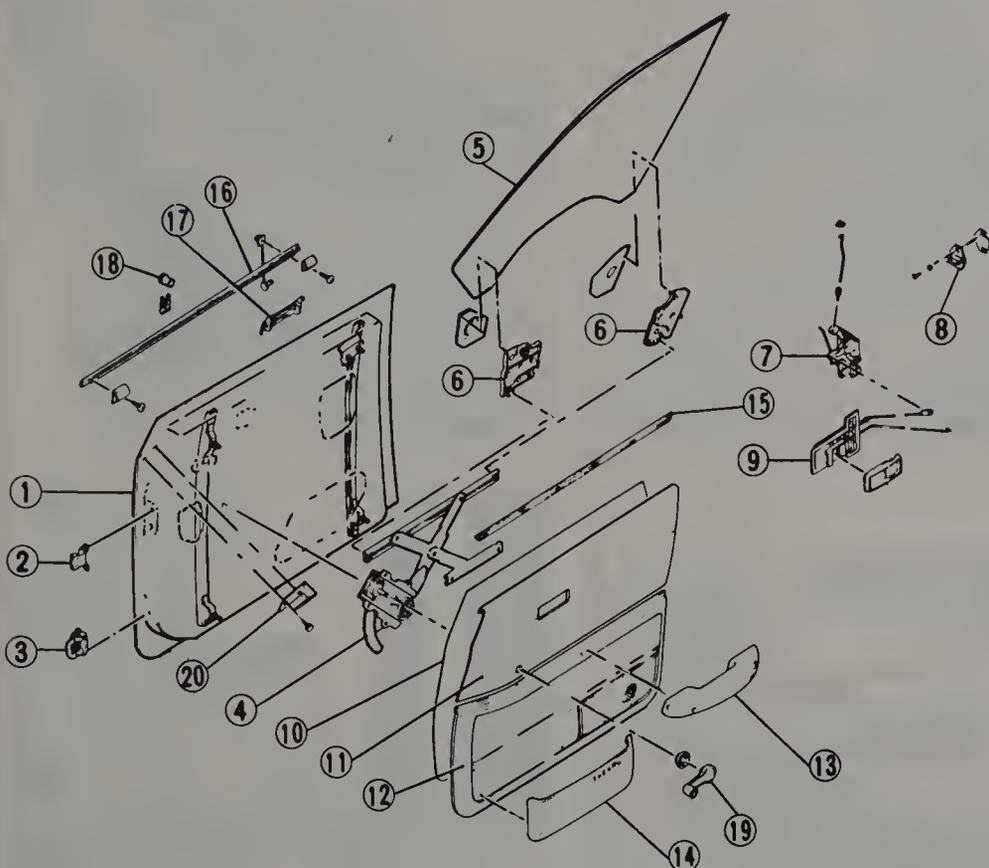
Door components – exploded view (typical) (Sec 12)
